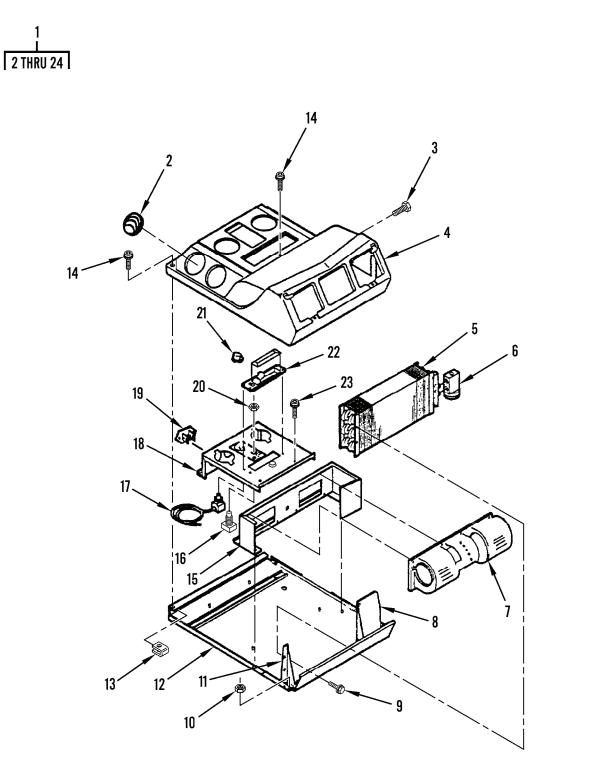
A/C Evaporator Assembly (Sheet 1 of 2)
